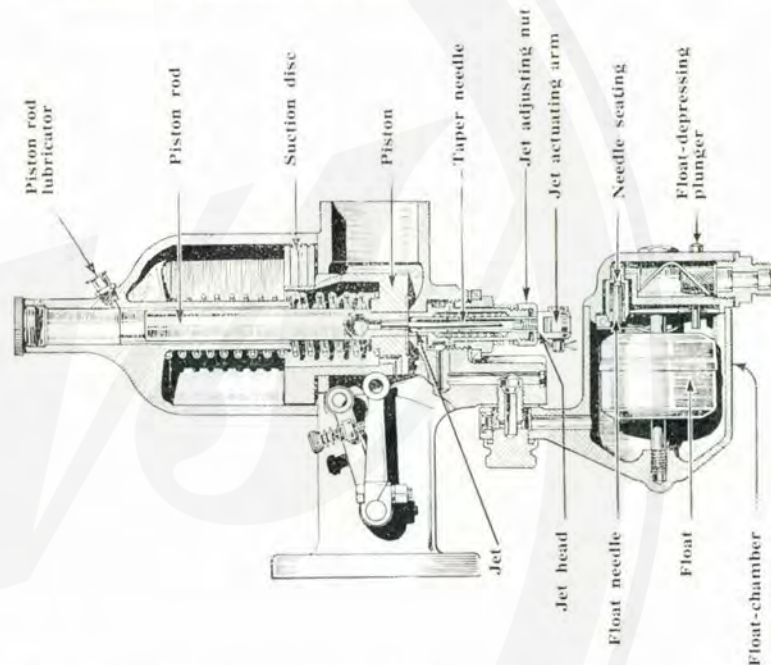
The S.U. carburettor in section clearly showing its internal construction.
